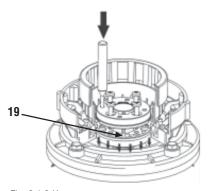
H - Dismantling of the drive magnet assembly
